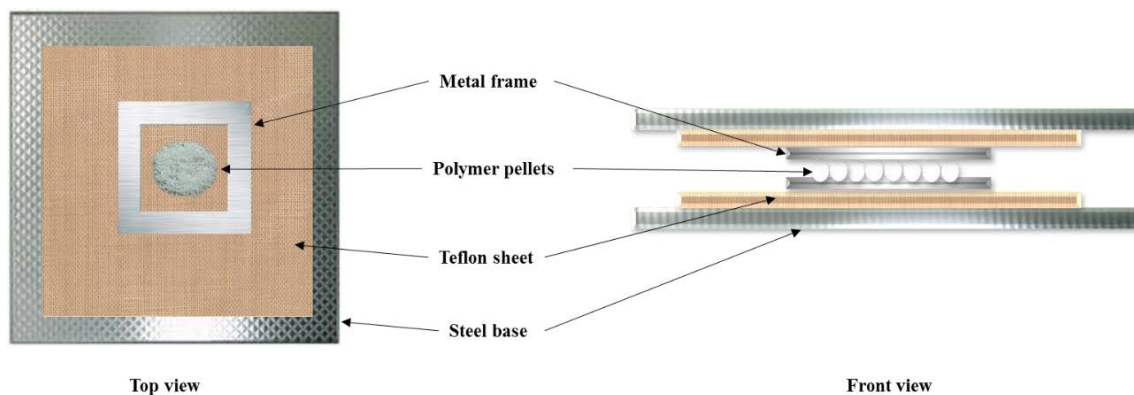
Illustration representing top and frontal view of the hot embossing apparatus. The components are layered as follows: steel base, teflon sheet, metal frame, PLA pellets, metal frame, teflon sheet, steel base.
